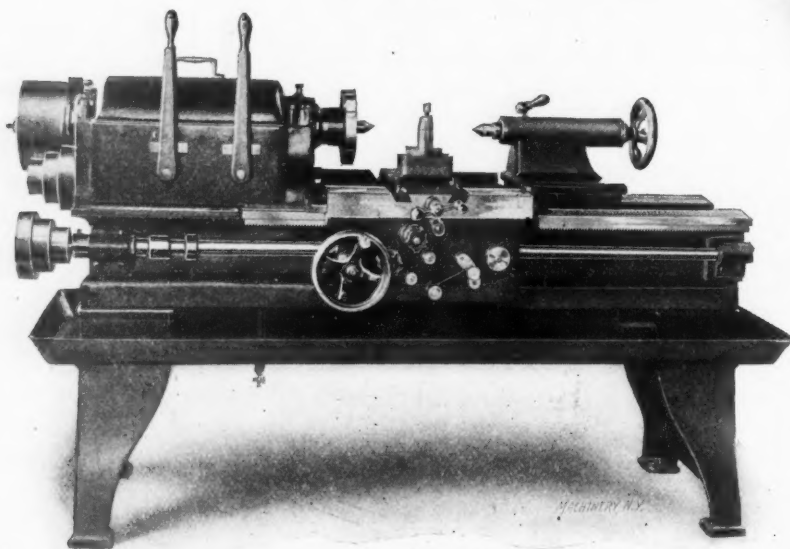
Fay & Scott 16-inch Geared Head Lathe
